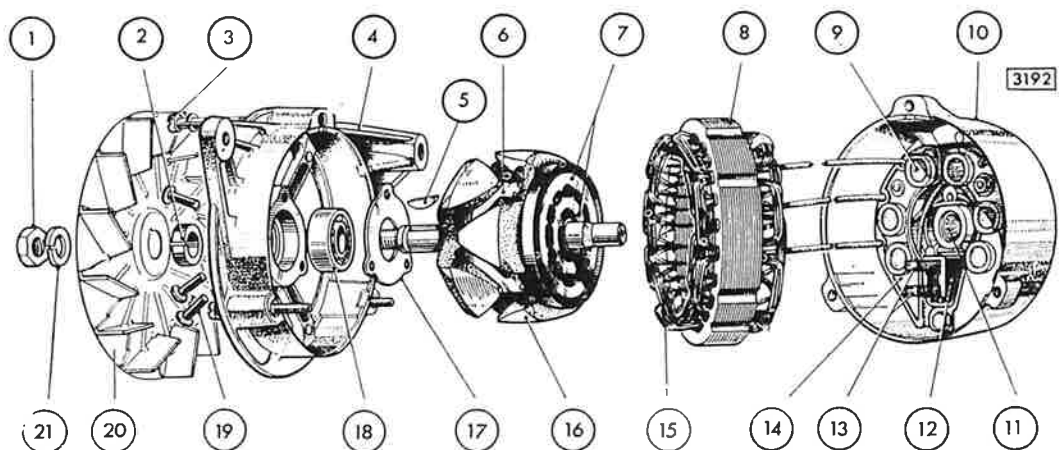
Exploded view of the Lucas 11 AC alternator.
